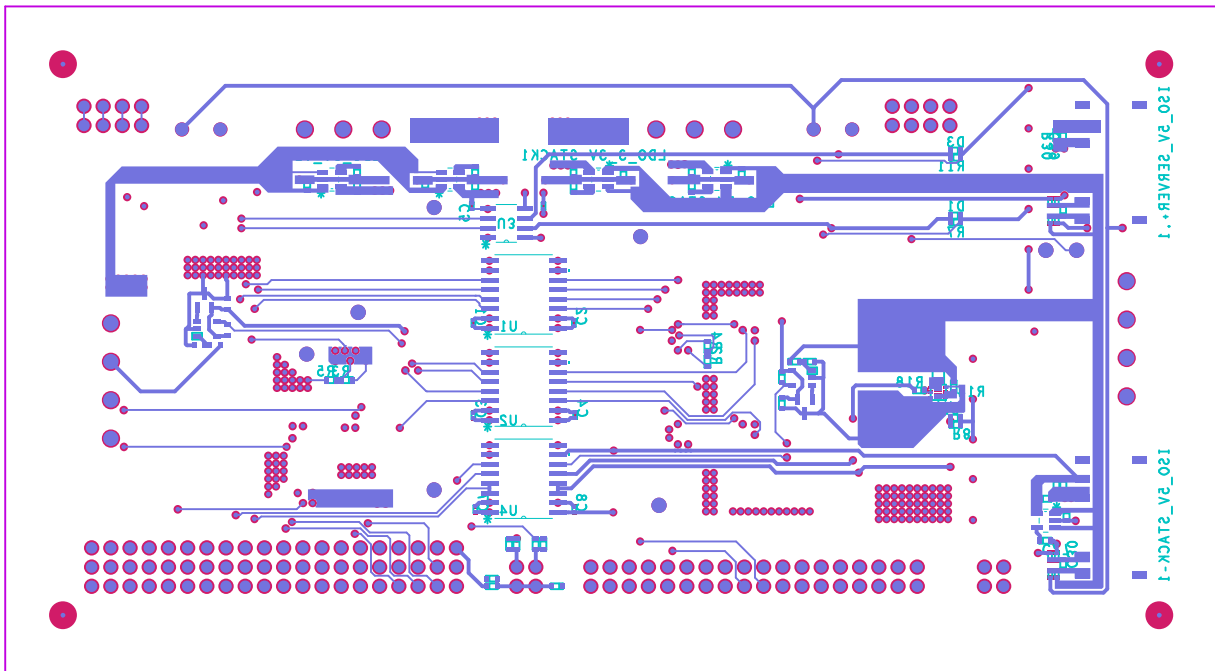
PCB layout of prototype DPP hardware: Bottom layer, silkscreen and solder mask.
